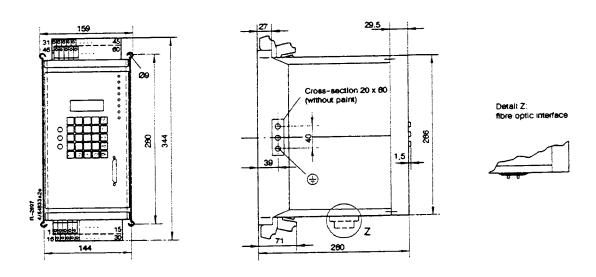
7SJ512 with housing 7XP2030-1 (for panel surface mounting with two-tier terminals)
